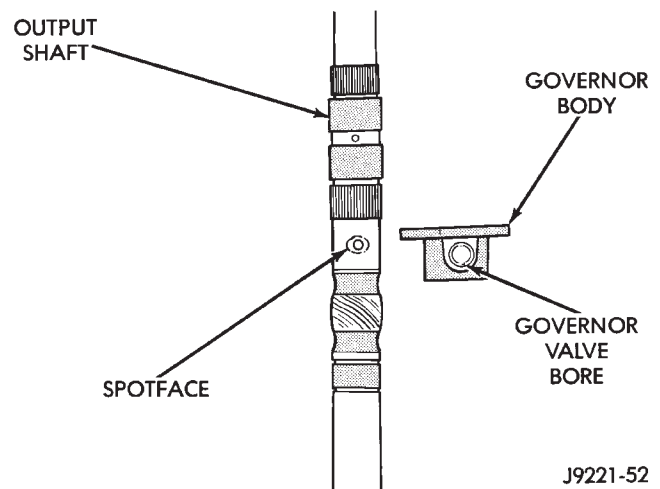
Governor Valve And Output Shaft Spotface Alignment
